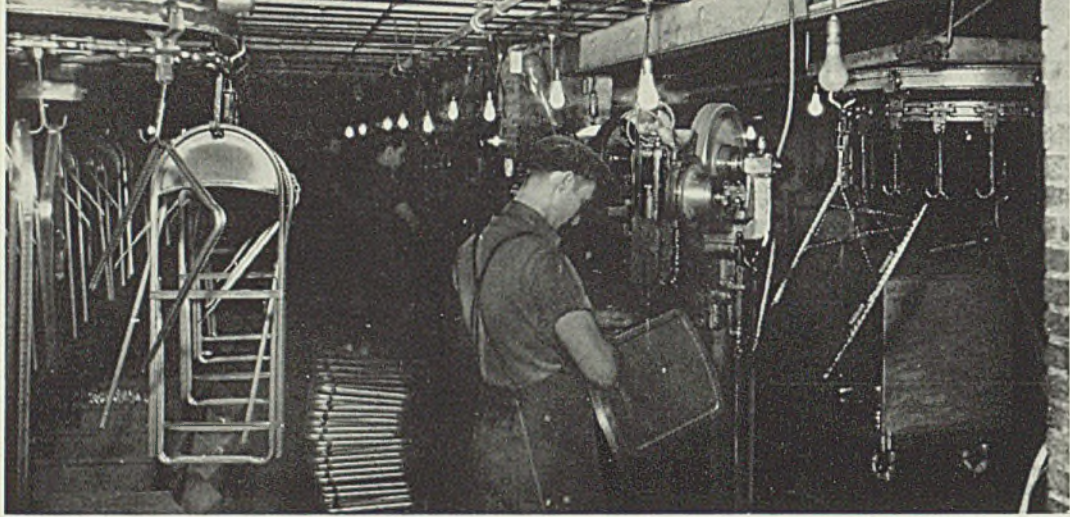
Part of initial assembly line on first floor showing final assembly station where operator rivets seat frame to chair, after which he hooks it onto storage conveyor No. 2, the loading of which is at the right. Photos show Link-Belt conveyor equipment
